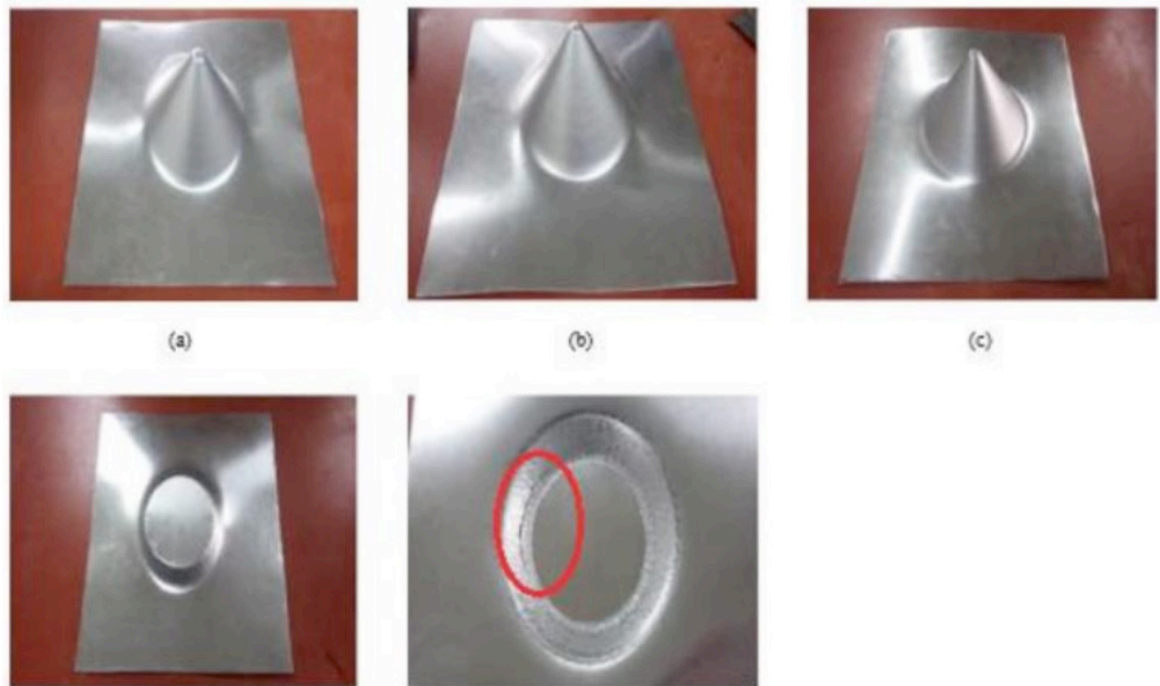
a) Stamped sheet after test 1; b) after test 2; c) after test 3; d) after test 4; e) Detail of surface finish and crack produced in test 4.
